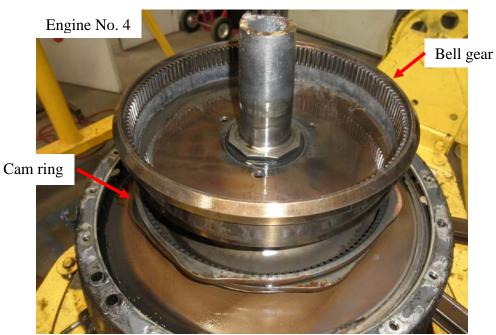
View of the bell gear showing that it was intact and had no rotational damage to the gear teeth. Also shown is the cam ring showing that it was intact.
